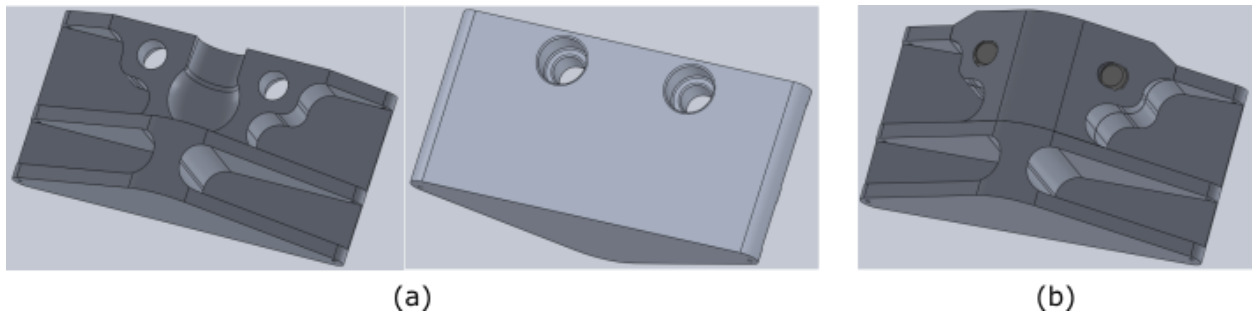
SolidWorks models of (a) bottom segment base and (b) bottom segment assembly.
